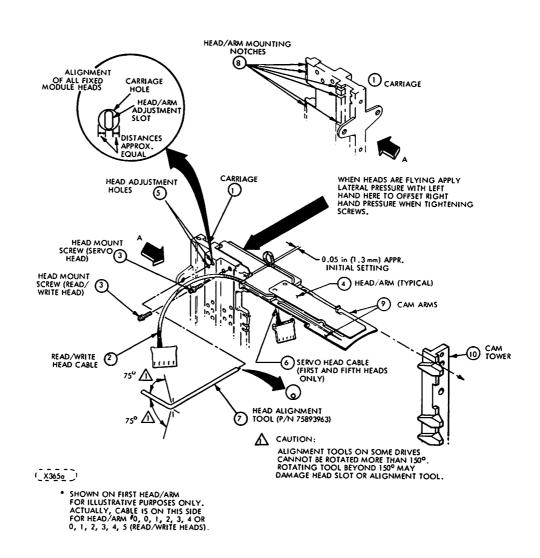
HEAD/ARM REMOVAL AND REPLACEMENT AND ALIGNMENT
